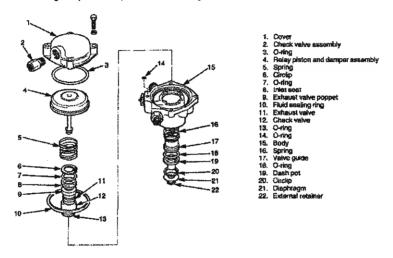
Spring Brake Relay Valve (CA41 PARC) - Exploded View
